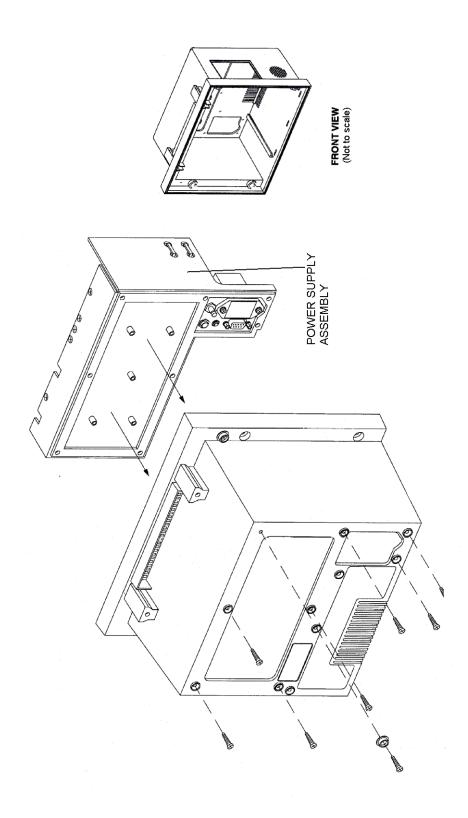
A3 Rear Case Assembly Drawing (3 of 3)
